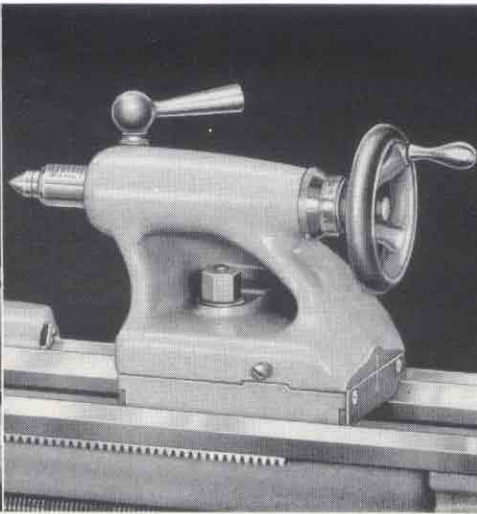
Tailstock Design Used on 10" Swing Lathes
